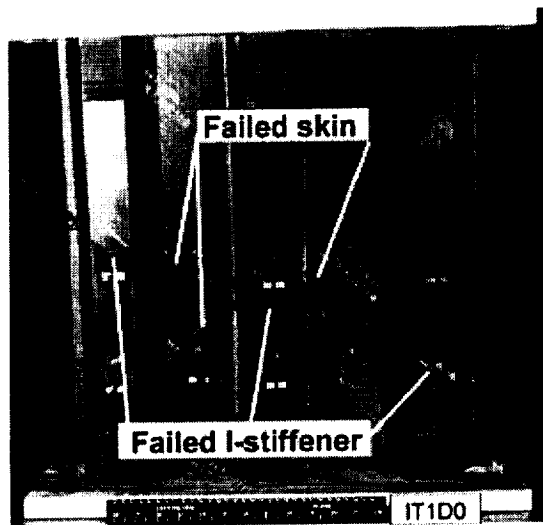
Failure location on stiffener side of Specimen IT1D0.
